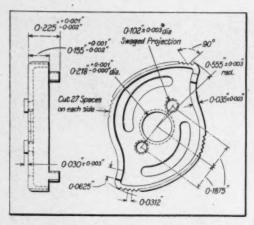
Details of the Serrated Cam Broached with the Set-up Shown in Fig. 13
